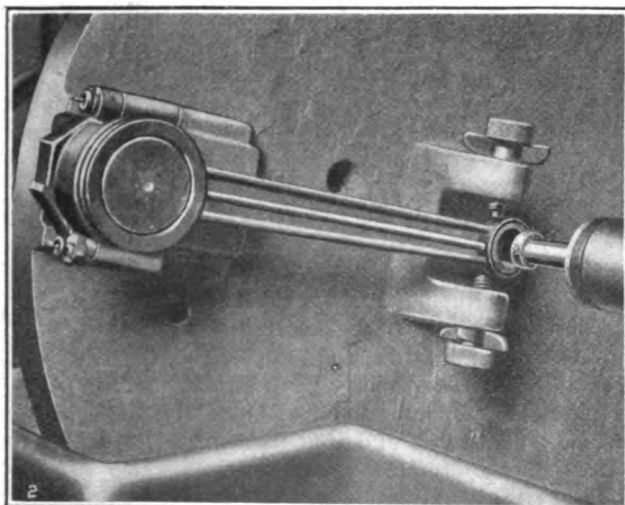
FIXTURE FOR GRINDING CONNECTING ROD BUSHINGS. FIG. 3—GRINDING STEERING KNUCKLE BALLS
